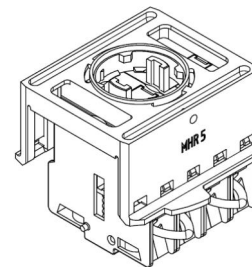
Assembly of MTZU + MTZU_564 to the module holder MHR_5
